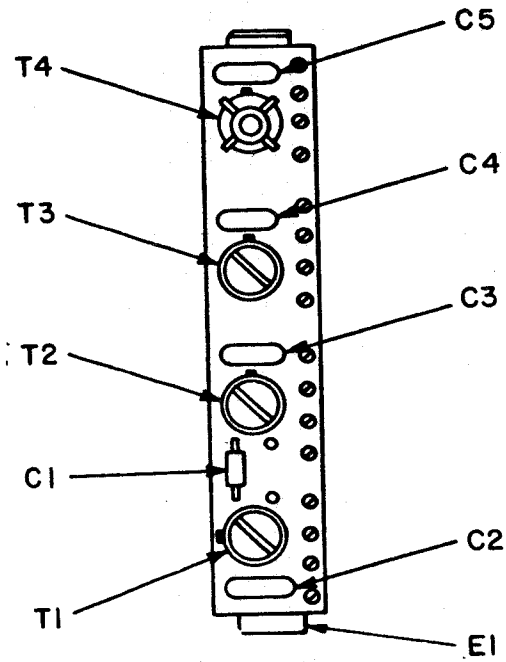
26 MHz Subassembly A2A4A16, Component Locations
